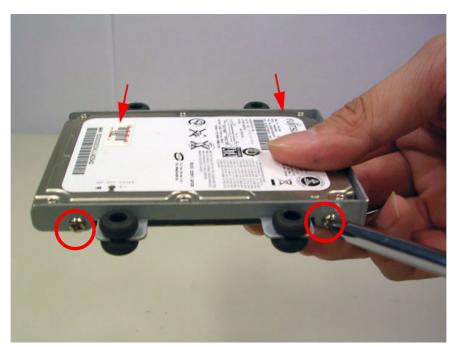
Assemble HDD and HDD frame with 4 screws
